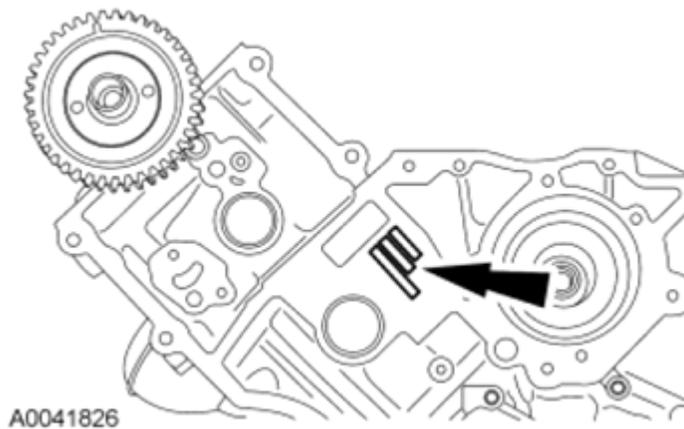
Locating Main Bearing Code Found On Front Of Engine Block
